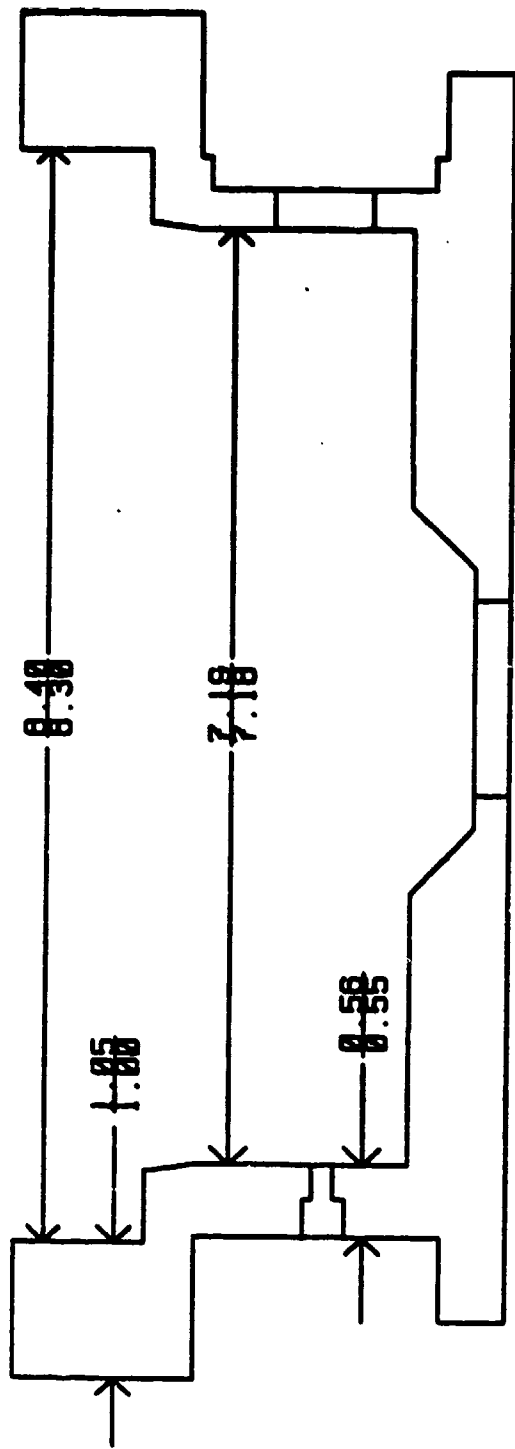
Driver Housing--Side View Section AA Showing Electrical Leads, Bolt Holes, Microphone Penetration, and FET Follower Housing.
